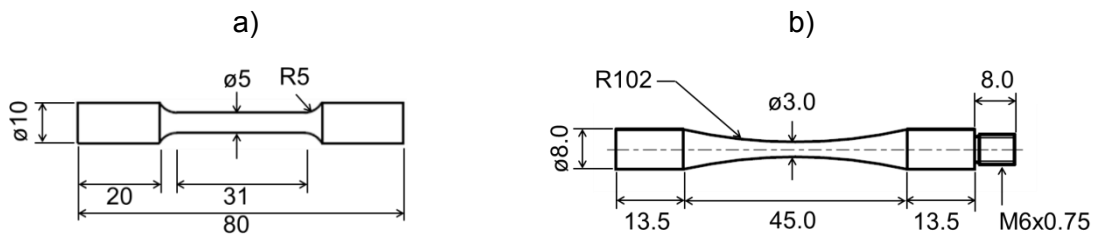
Technical drawing: a) tensile test specimen, b) VHCF specimen
